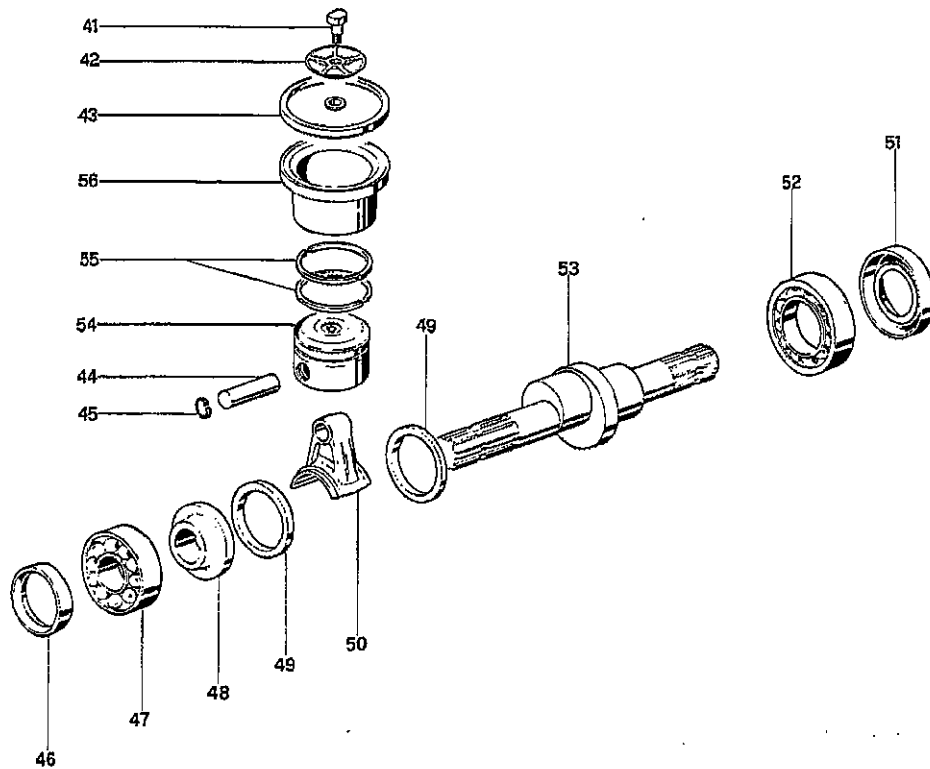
PA908 PUMP ASSEMBLY (3-7328)
